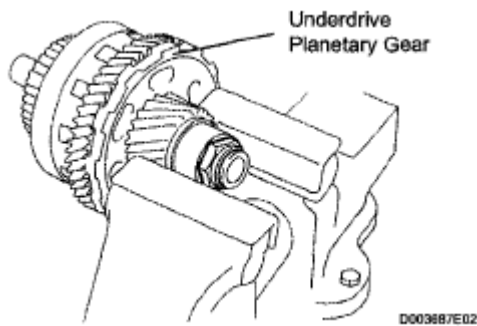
Placing Underdrive Planetary Gear In Soft Jaw Vise
